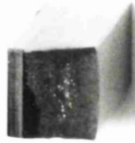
Izod impact test specimens of forgings after fracture.
